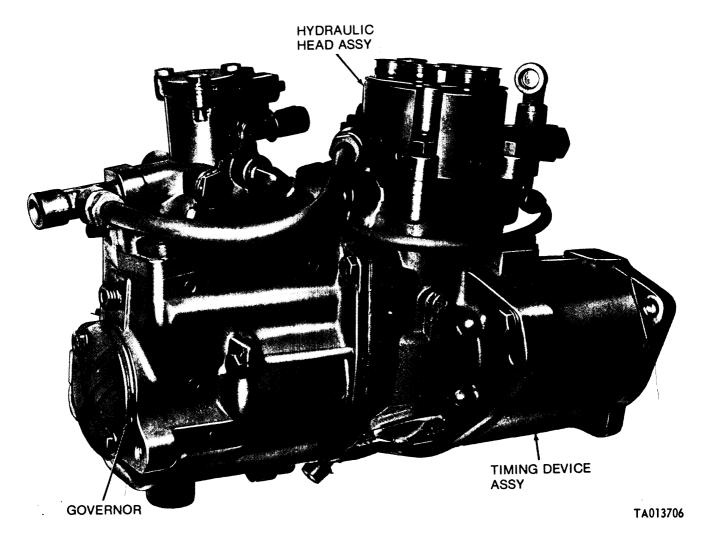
Metering and distributing fuel injection pump asssembly (codes C, D and E), right rear view.
